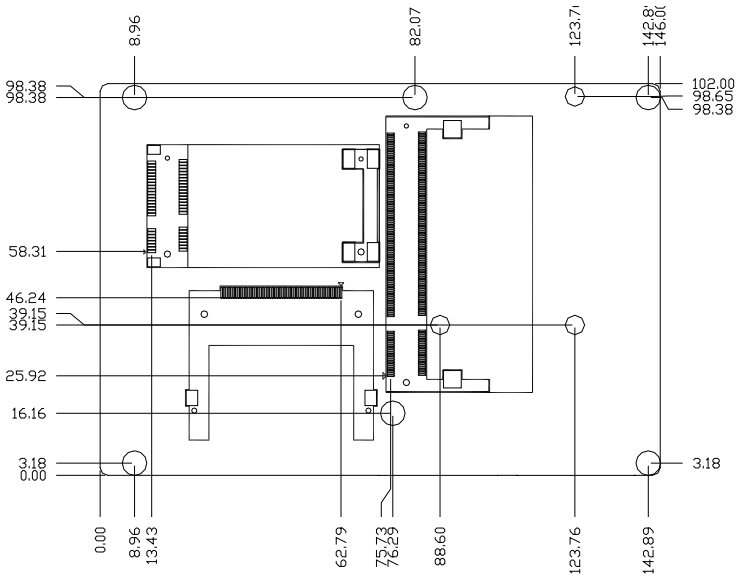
PCM-9363 Mechanical Drawing (Solder Side)
